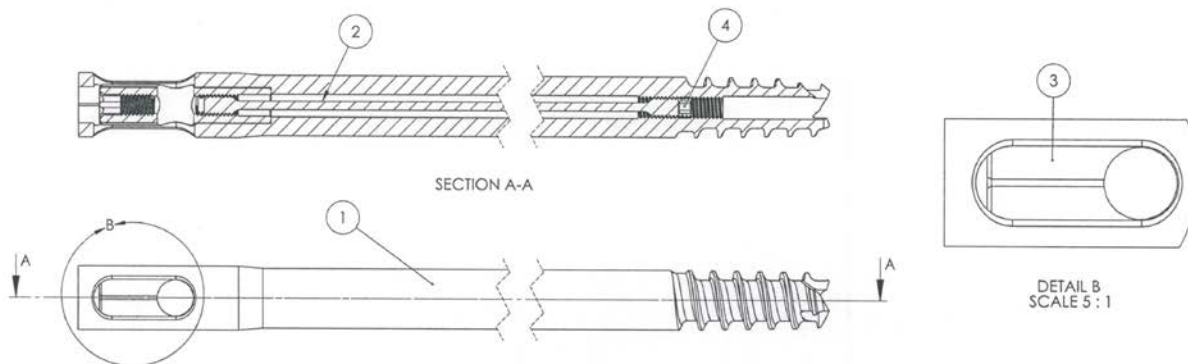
Manufacturing schematic for assembly of internal components of dynamic prototype device.
